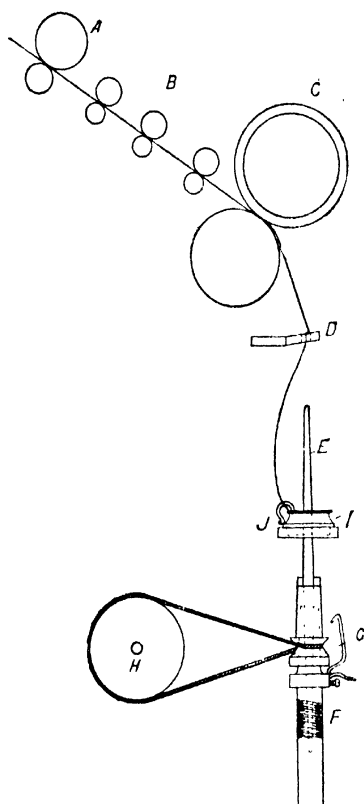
Ring Spring Frame. —*A*, back rollers; *B*, carriers; *C*, front rollers; *D*, eyelet board; *E*, spindle; *F*, spindle support; *G*, spindle wharf; *H*, tin drum round which spindle band passes; *I*, ring; *J*, traveller.
